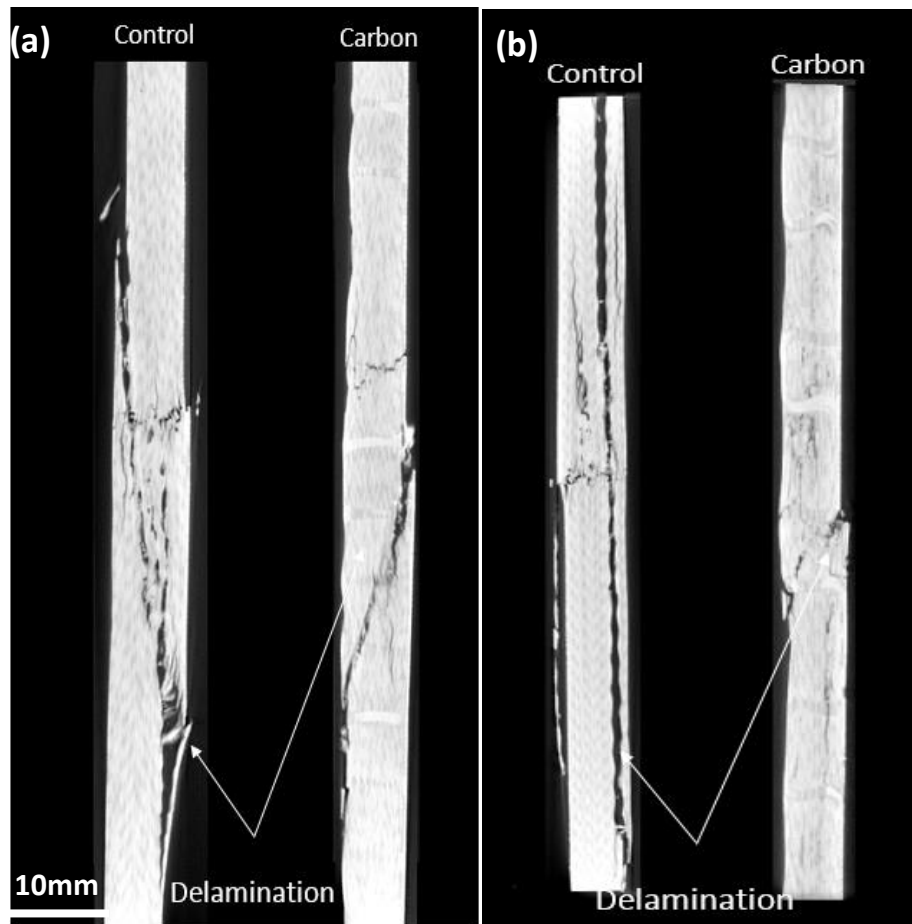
X-ray images showing compressive failure in (a) 25 J and (b) 50 J.
